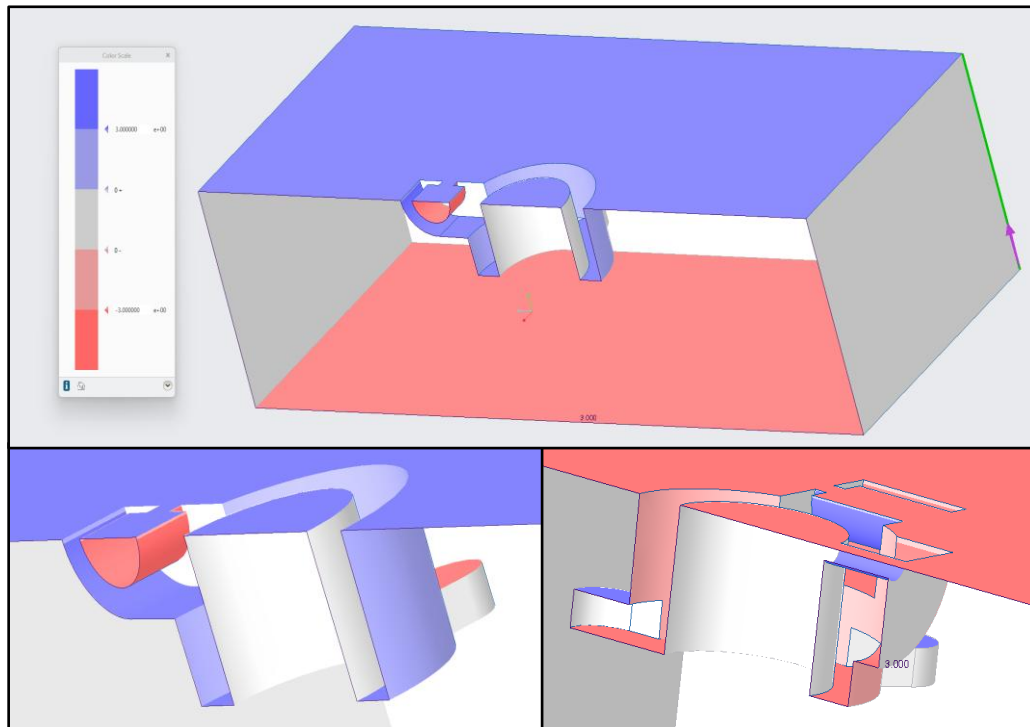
Draft analysis of the extracted mould blocks (wire frame view)
